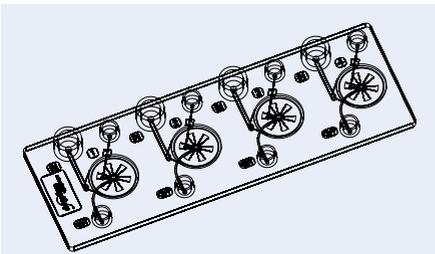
Schematic drawing of membrane chip Fluidic 168
